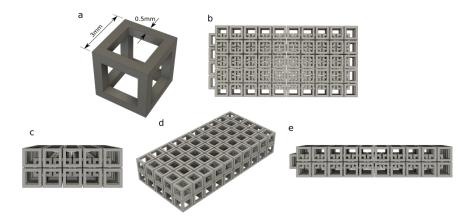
(a) Geometry of a cube link, (b) top view, c) end view, d) perspective view and e) side view of the CAD chainmail.
